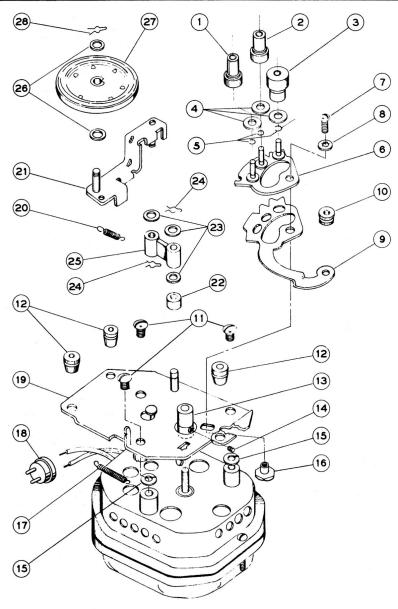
Assembly of Motor Stamped 6542 (For 930409-16 and-17)
